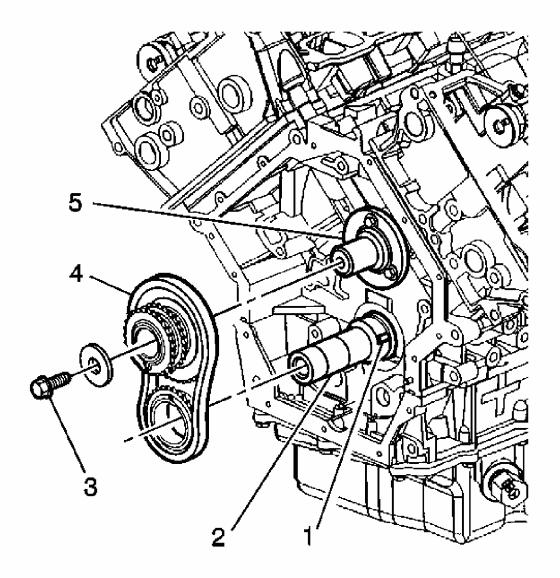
Identifying Camshaft Intermediate Sprocket Retaining Bolt & Camshaft Drive Chain
